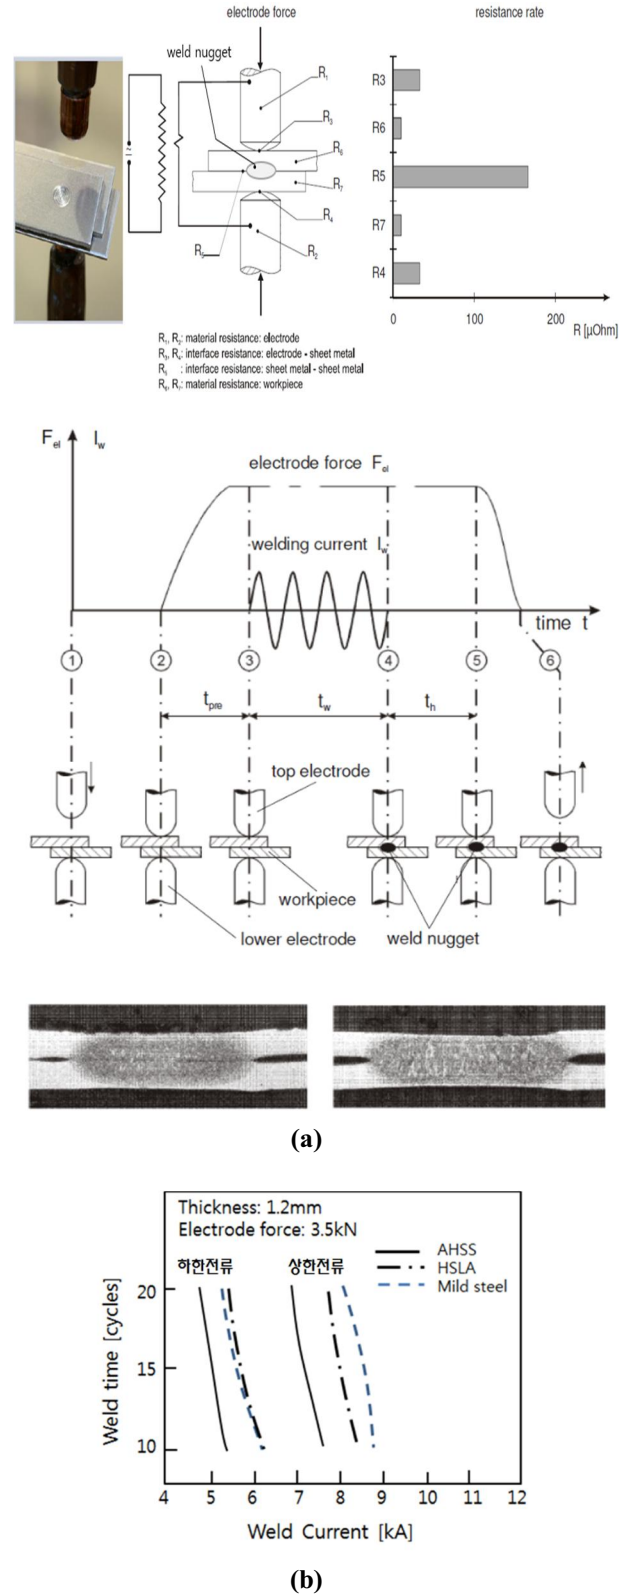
(a) Schematic view of cross-section of a resistance spot welding [13], (b) Welding lobe curves for HSLA, AHSS and mild steel[11]
